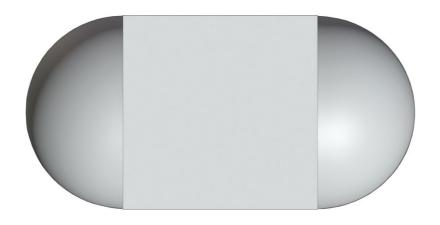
16 SEGMENT HALF SPHERE END OBLIQUE END VIEW
